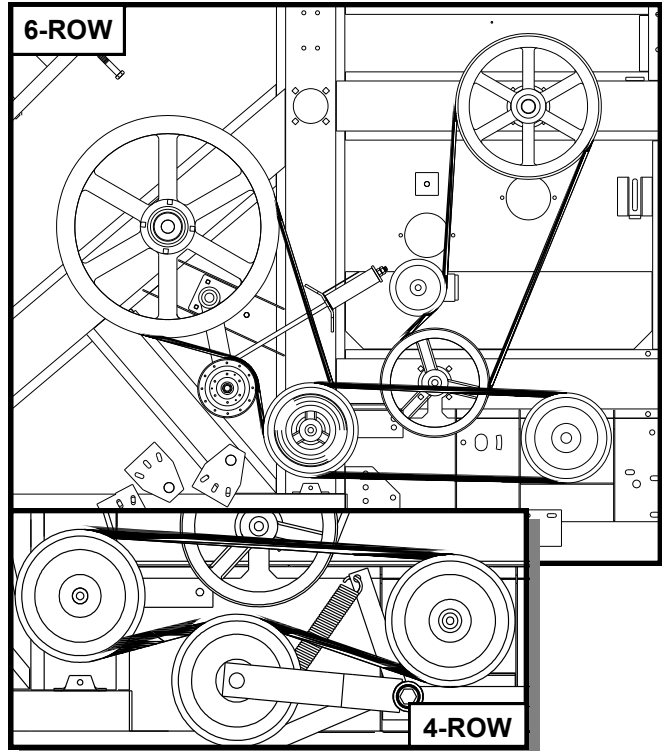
ECCENTRIC & JACKSHAFT DRIVE
